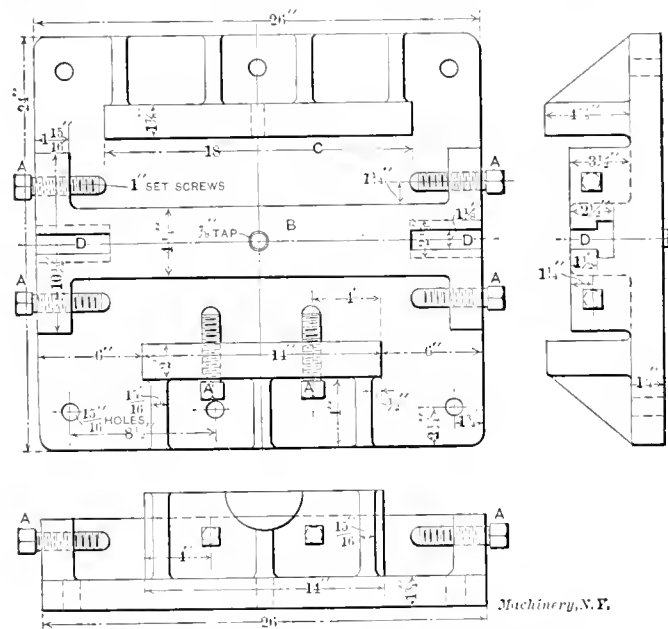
Detail of Jig used on Horizontal Boring Mill.
